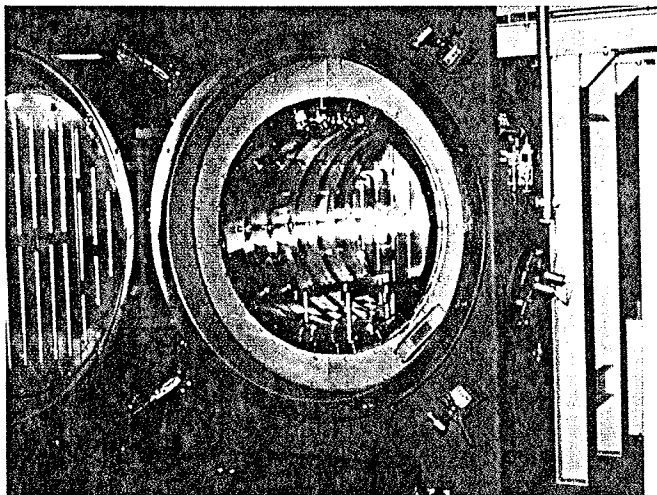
Vacuum furnace chamber for brazing cycle is designed with five all-metal heat shields and moly heating elements.
